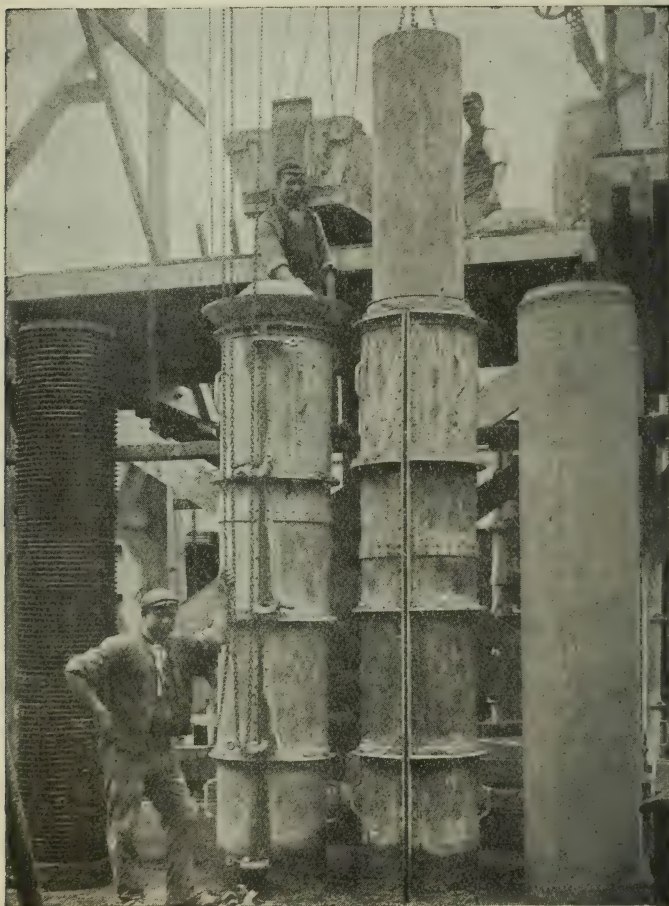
“Bonna” Pipe : Cores being withdrawn.
